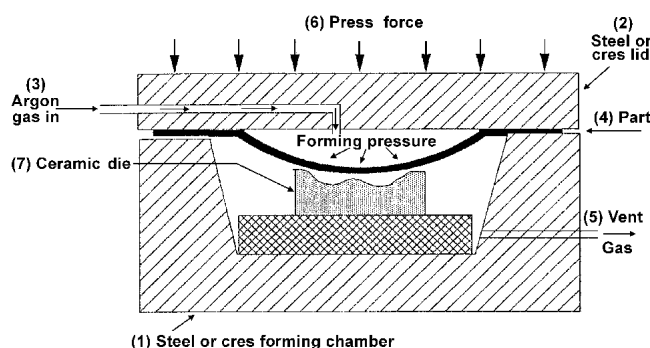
Schematic of a forming chamber with a ceramic die, using a method developed by Goodrich (Ref. 2). Pressure is contained by the CRES chamber (1) and lid (2) as gas enters through the port (3). Part (4) is formed against the ceramic die insert (7) as gas is vented (5) from the interior of the die. Press force (6) is used to maintain a gas seal as pressure increases.
